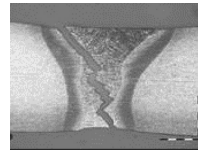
Typical fracture form of laser hybrid welded specimen after tensile strength test (material Optim 960 QC, 6 mm) (Ref. 9).
